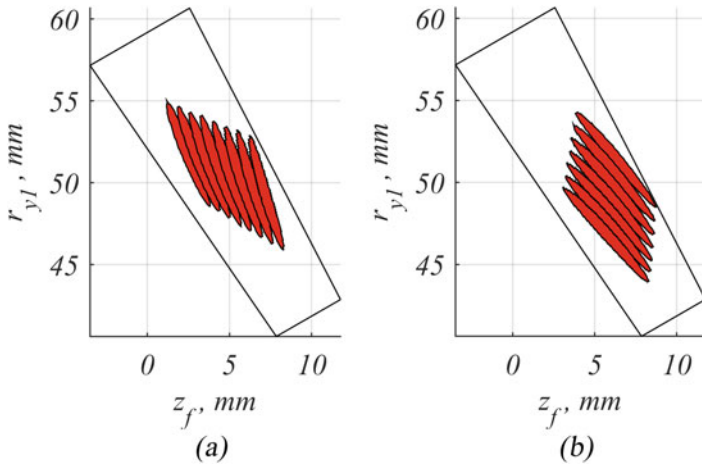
Tooth contact pattern in the DUPLEX helical gear pair: pinion’s concave side (a) and pinion’s convex side (b)
